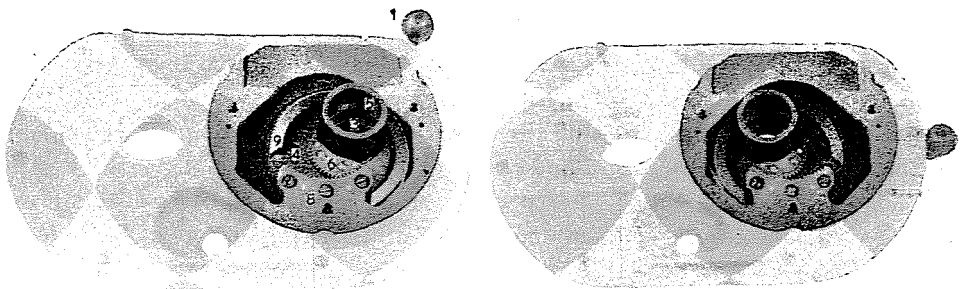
Rear view of the eyepiece control of Fig. 11, with the eyepieces in extreme position
